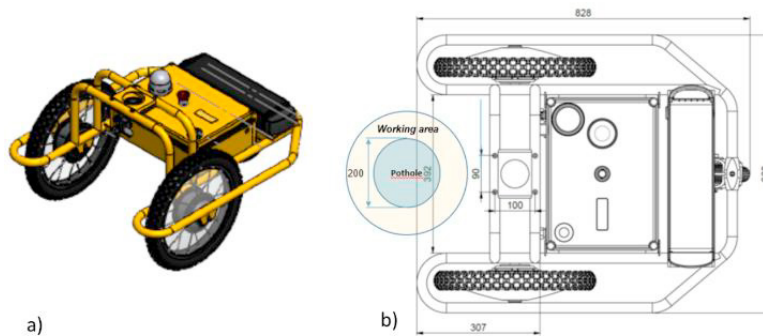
Extruder morphology. a) The autonomous carrier b) working area; dimensions in mm.
